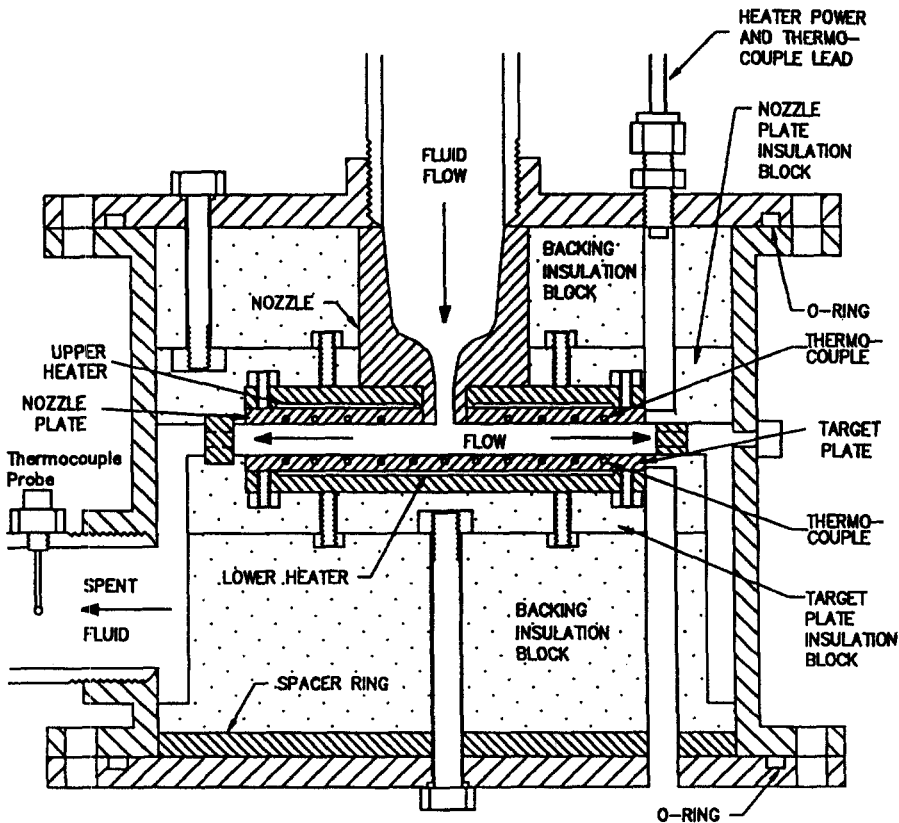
Cross-section of single-jet heat transfer test section assembly.
